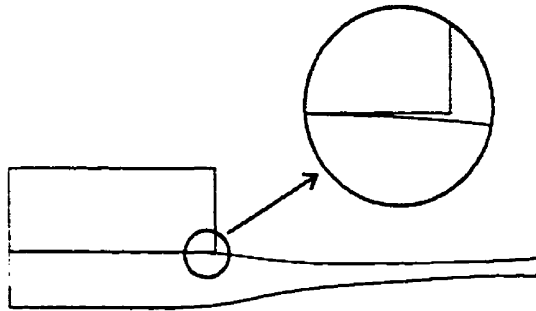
Surface of contact between the yoke specimen and the test fixture
